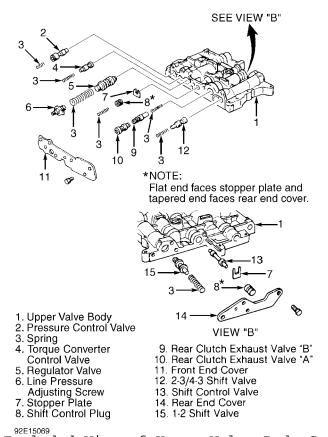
Exploded View of Upper Valve Body Components Courtesy of Mitsubishi Motor Sales of America.
